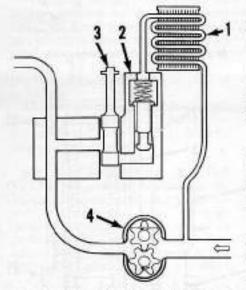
View of typical hydraulic oil cooler system used on models equipped with power shift transmission.
